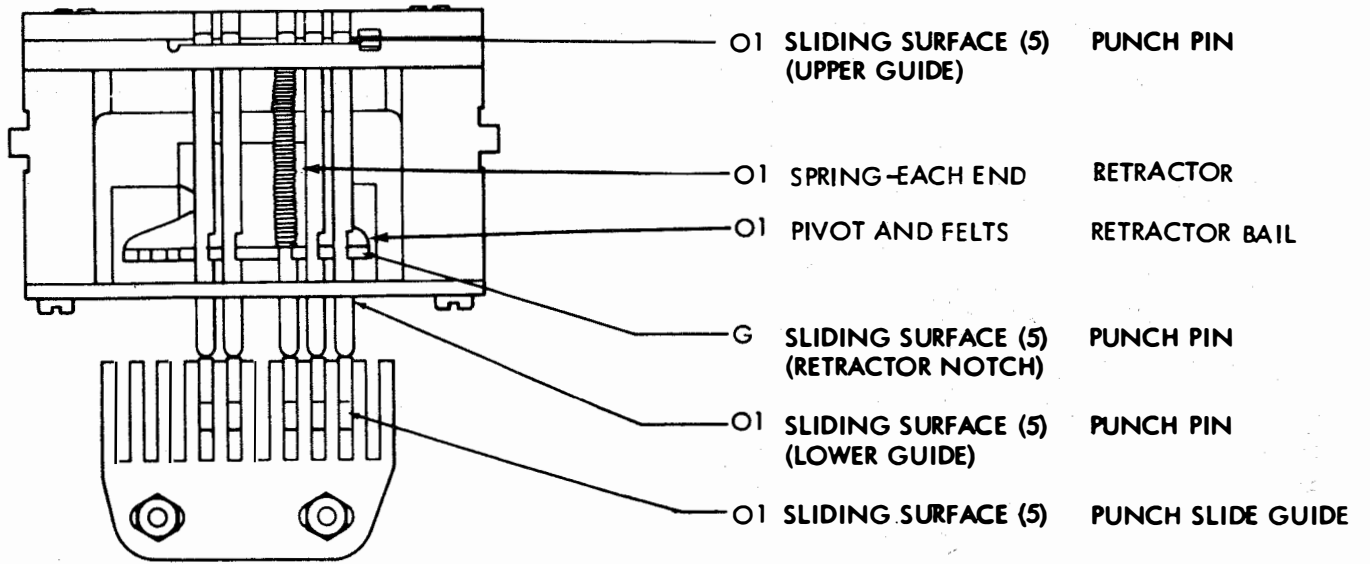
Punch, Pin, Retractor, and Punch Slide Guide for Chadless Tape Mechanism
